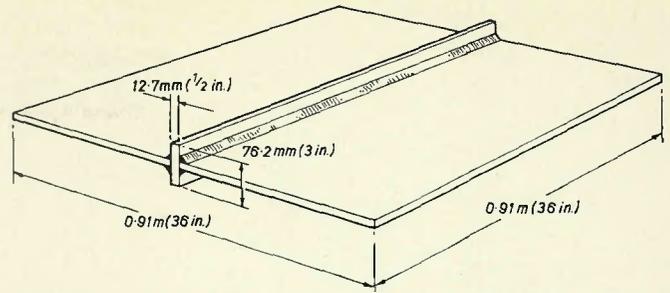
Details of cruciform joint for production of specimens for fatigue testing
